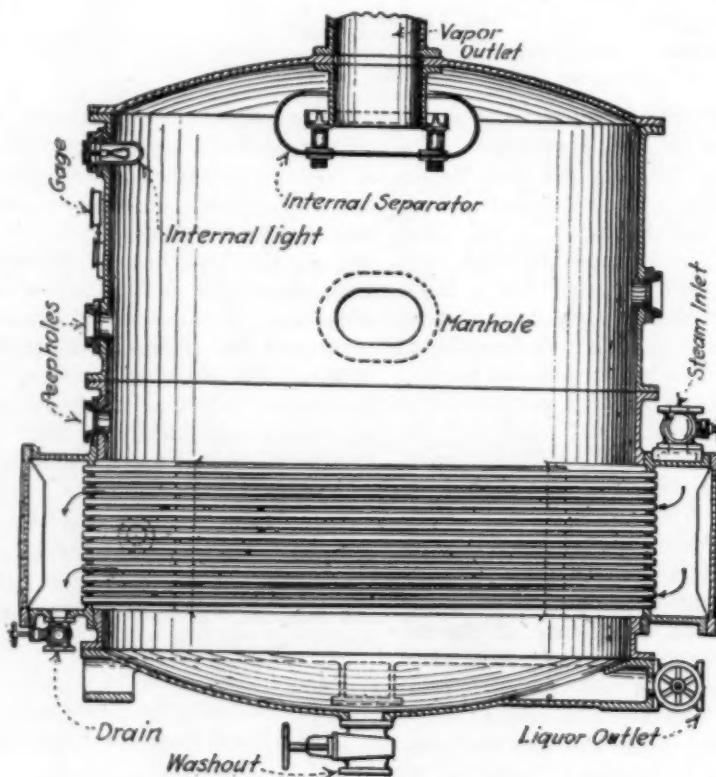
HORIZONTAL TUBE EVAPORATOR
